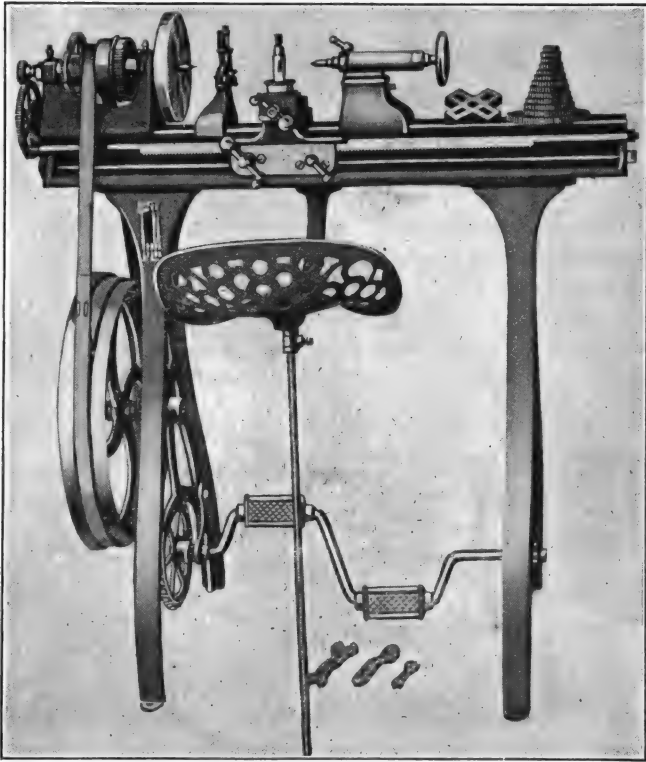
A good type of screw-cutting lathe with foot-power drive. This lathe can also be driven by an electric motor.
